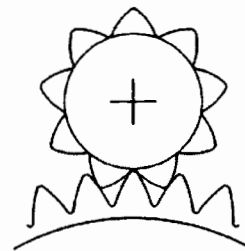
Comparison of Pinion and Gear Tooth Thickness
